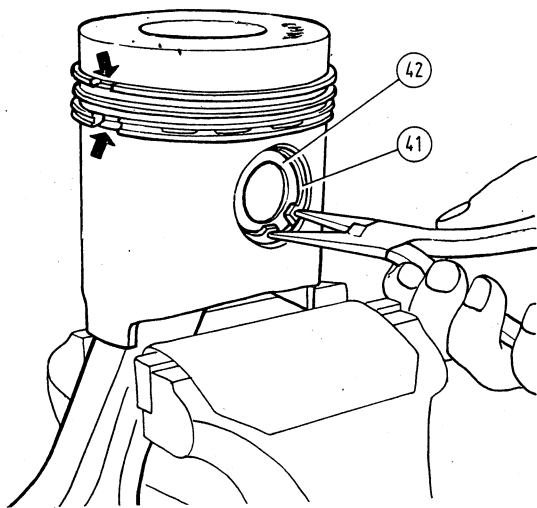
Removing the piston pin (42) retaining rings (41). (Arrows indicate assembly arrangement of piston rings).
